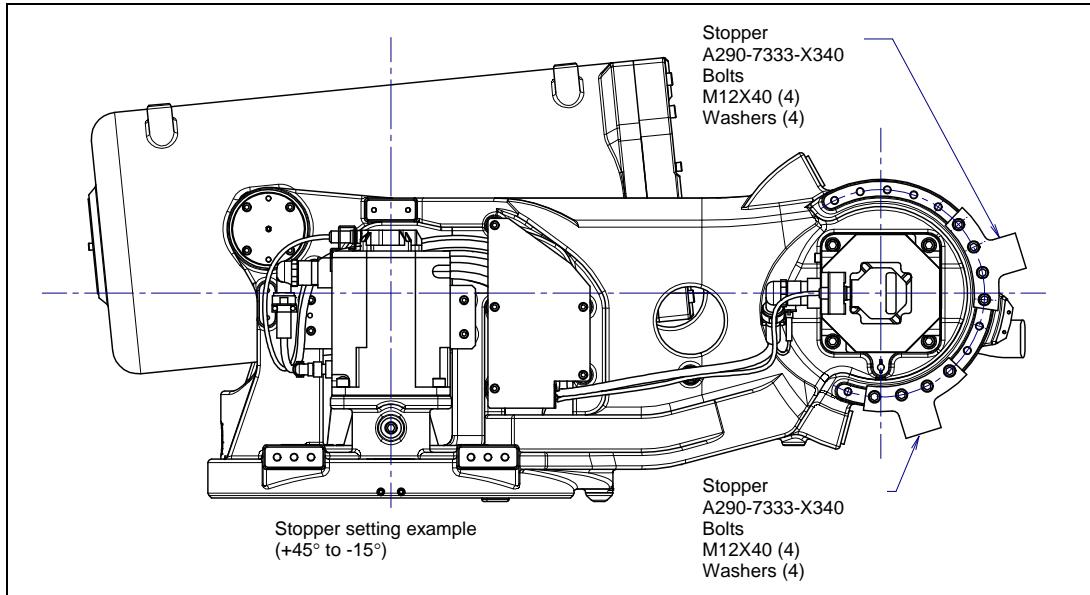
(k) Mounting the J2-axis adjustable mechanical stopper (1/2)
